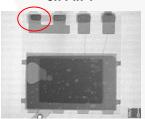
X-RAY of Tilted Component, Insufficient Solder on Pin 4
